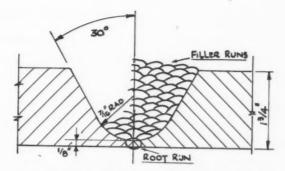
Typical weld detail — Double operator inert gas tungsten arc technique employed on root run inert gas metal arc on filler runs
